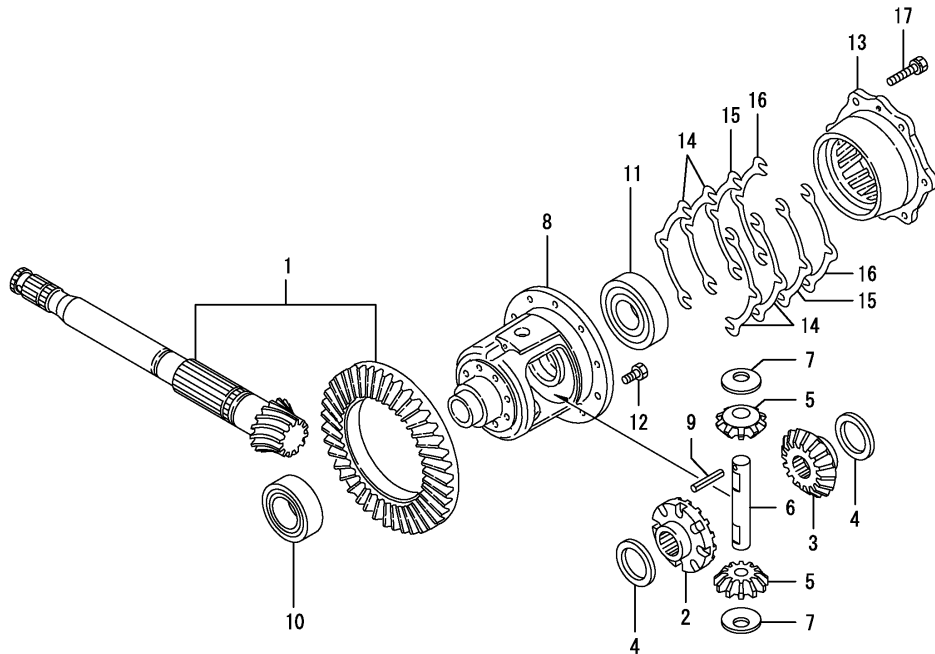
RING GEAR & DIFFERENTIAL GEAR
